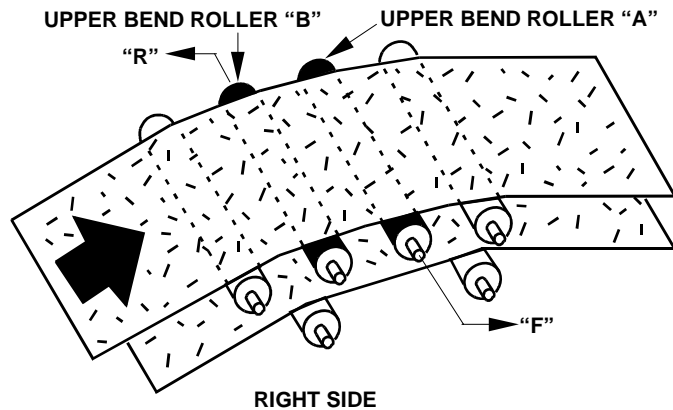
Adjusting the Right Side of the “Tail End” Snub Roller.
